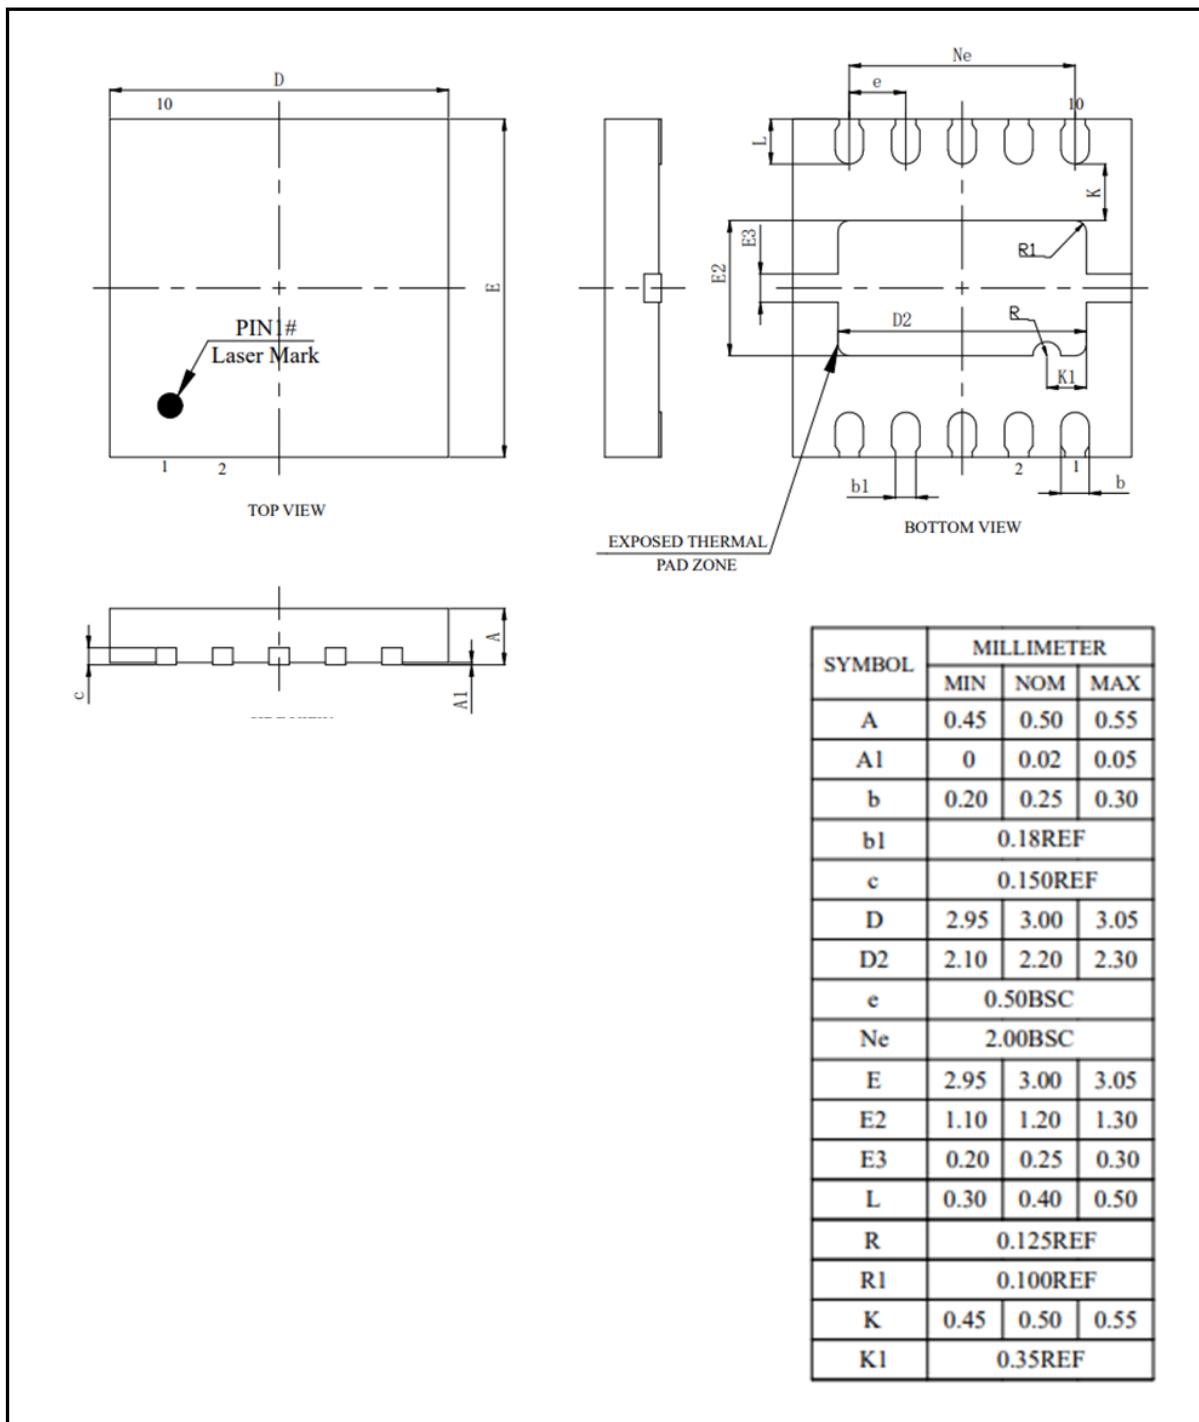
SSOP10 Mechanical Data and Package Dimensions
